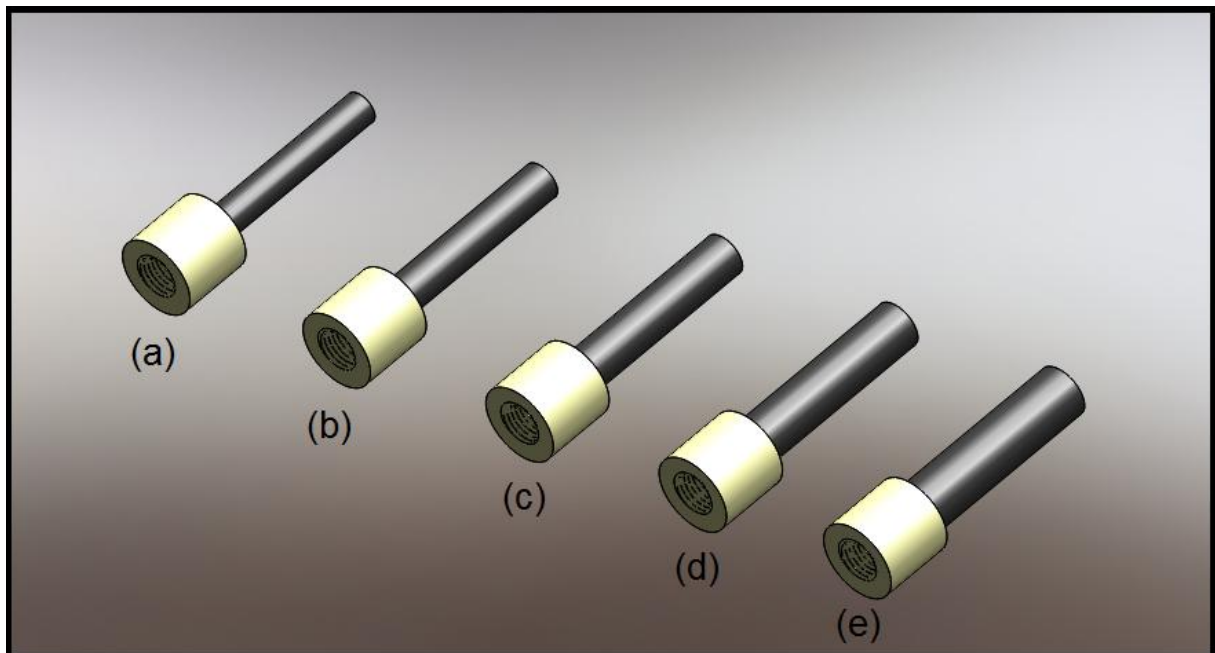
5 valve holding pieces. (a)  $\alpha$  piece, (b)  $\beta$  piece, (c)  $\gamma$  piece, (d)  $\delta$  piece, (e)  $\epsilon$  piece
